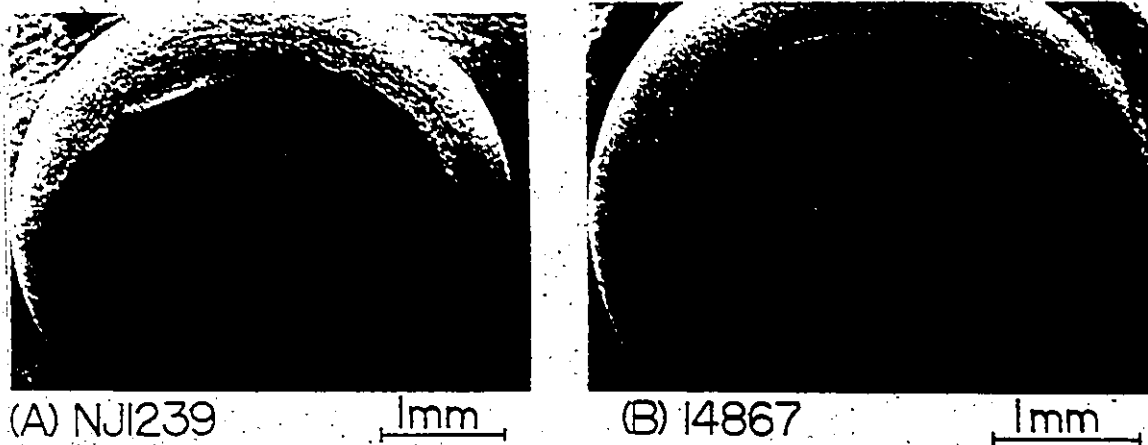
Macroscopic fracture surface appearance of steel A (Figure a) and steel D (Figure b), tested at ambient temperature and pressure, in the rolling direction. Note bands of damage across the fracture surfaces.
